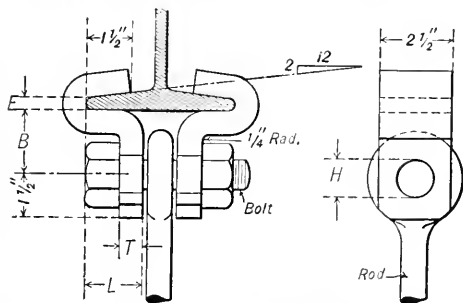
DETAIL OF I-BEAM CLAMP (OPEN TYPE.)
